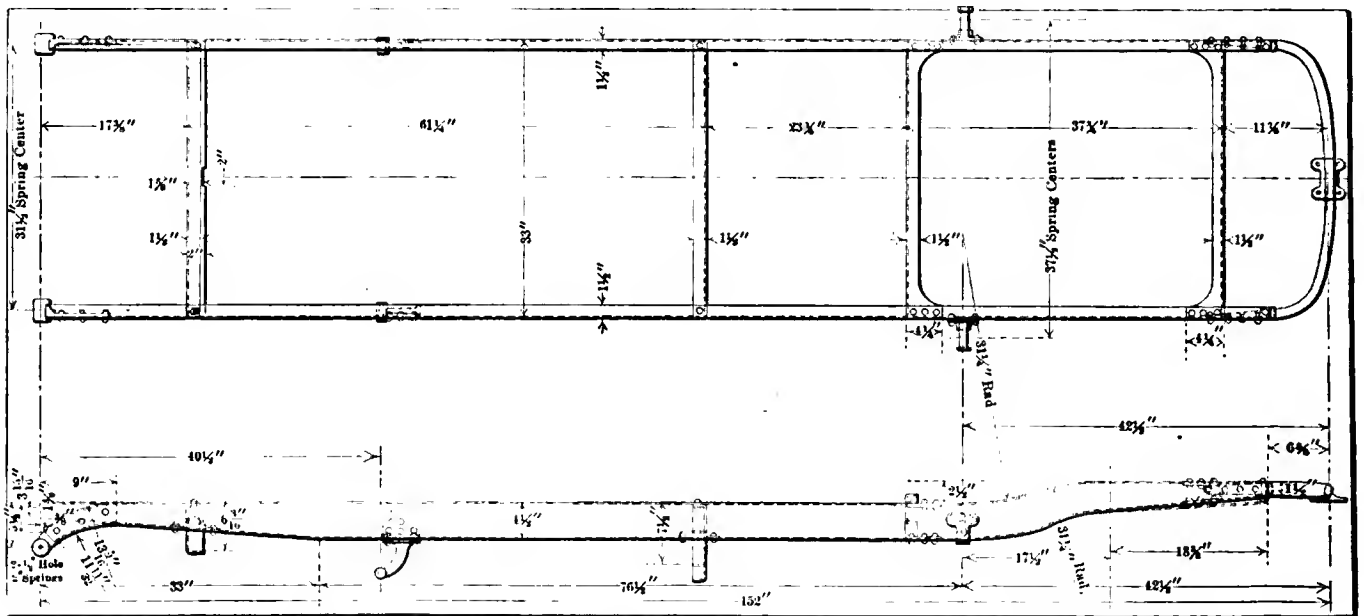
Corbin frame in plan and elevation, with straight front, rear kick-up and supports for platform springs
